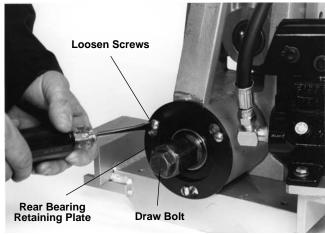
Loosening Draw Bolt and Retaining Plate Hex Screws
